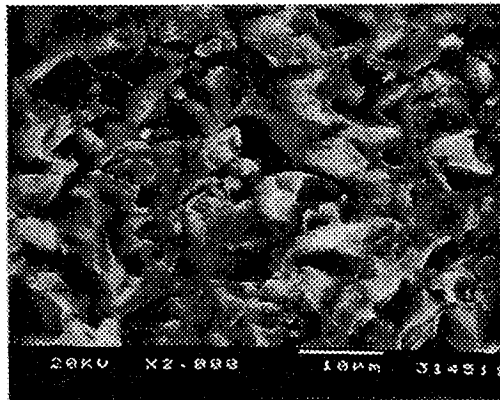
Initial Damage Zone of AWJ Machined Gr/Ep Laminate Specimen 1
